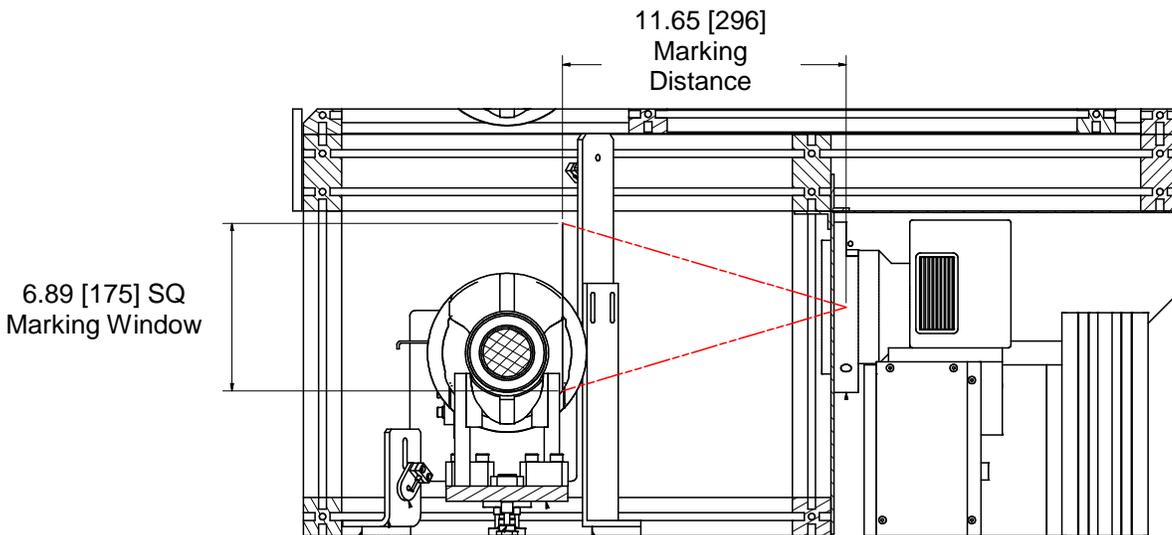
Telesis Laser Marking Unit and Lens Dimensions
